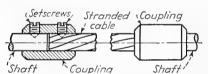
Coupling for low torques and unidirectional rotation. Inertia of rotating parts is low. This type is easily assembled and disconnected without disturbing either shaft. The cable can be encased and the length extended to allow for right-angle bends such as are used on dental drills and speedometer drives. The ends of the cable are soldered or bound with wire to prevent unraveling.
